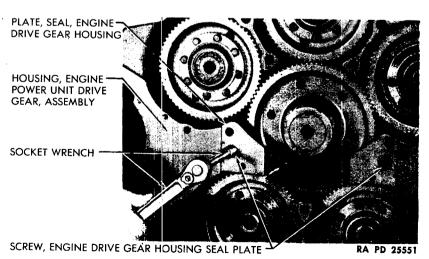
Installing Engine Drive Gear Housing Seal Plate
